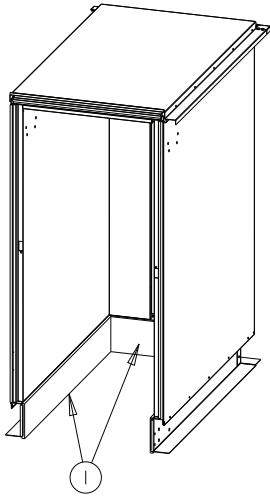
Pipe cabinet installation, unit sizes 3 to 35 (des seq M or later)
